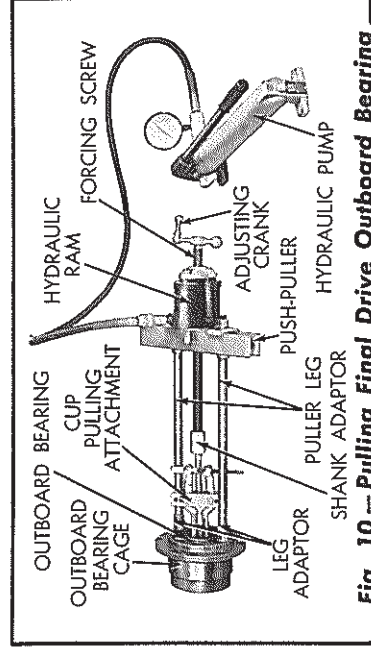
Pulling Final Drive Outboard Bearing from Outboard Bearing Cage
